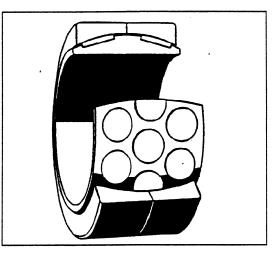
Type "P4S" Large Size Spherical Plain bearing with a sliding discs of special bronze materials between the inner and outer rings.
